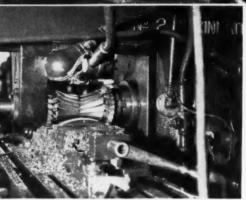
Milling Form on Mold Cap. The 6.230-In. Radius Must Be Accurate
